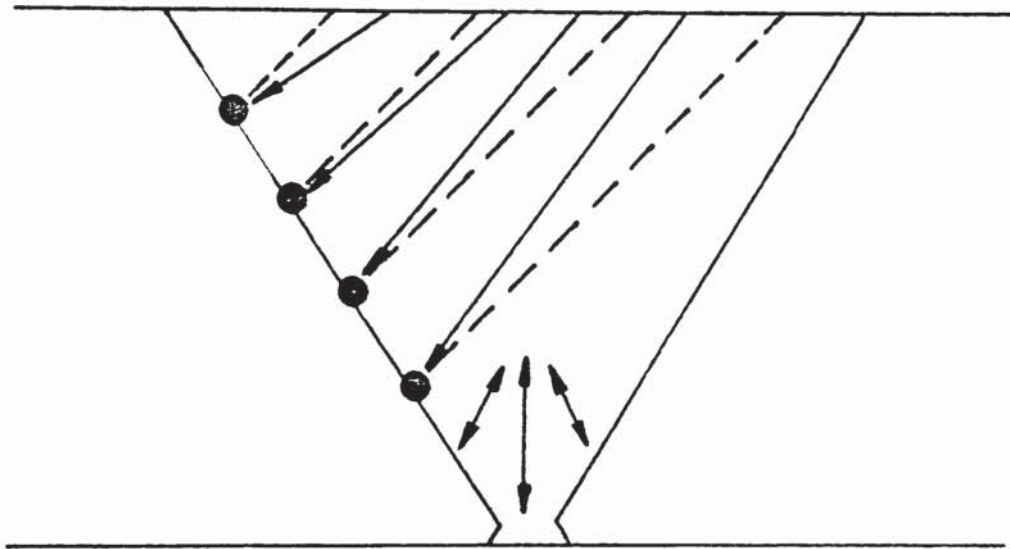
Establishing beam angle values in thick 316 austenitic weld material, using longitudinal wave angle probes
